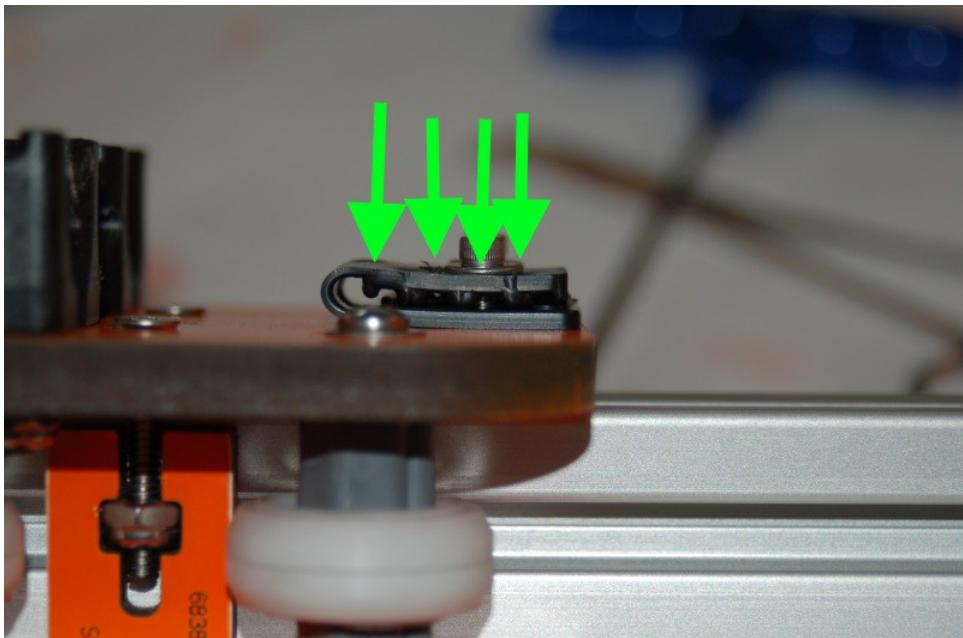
Belt clamp installed. Arrows indicate direction of teeth in the clamp.
